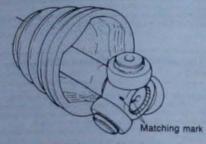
Mark the tripod joint and shaft for alignment prior to removal (Sec 4)
